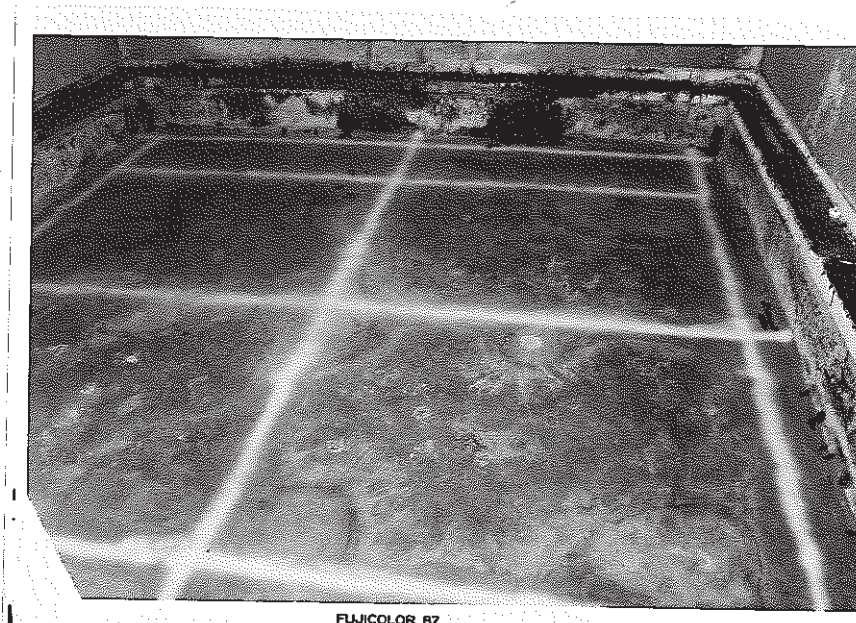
1 : Non-desructive Inspection of Weld Line
